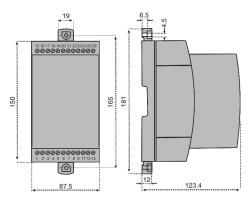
MXX in housing T24 screw hole mounting brackets pulled out.
